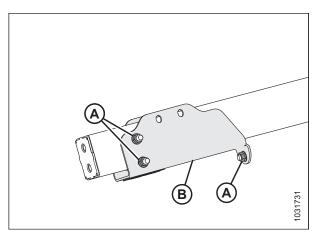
Center Reel Arm Shipping Channel – Double-Reel D1XL Series Header
